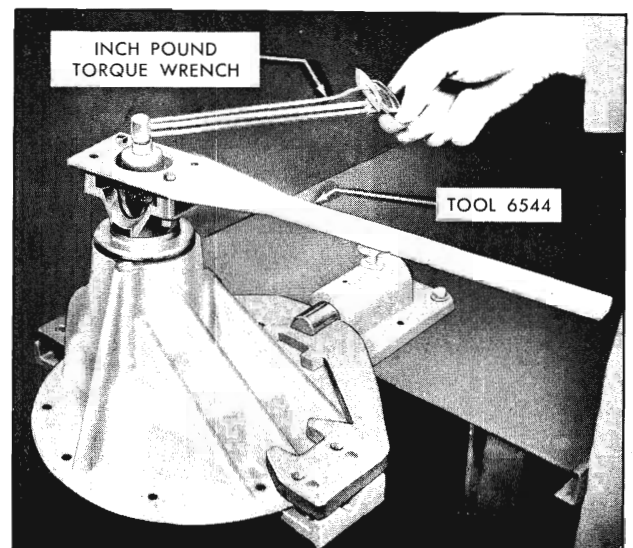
Measuring Bearing Preload With Torque Wrench
